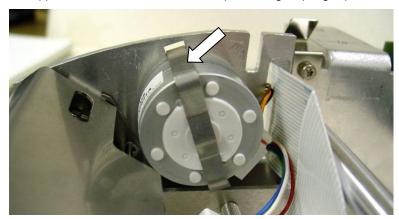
Label Stepper Motor and Mounting Clip (Label Side)
